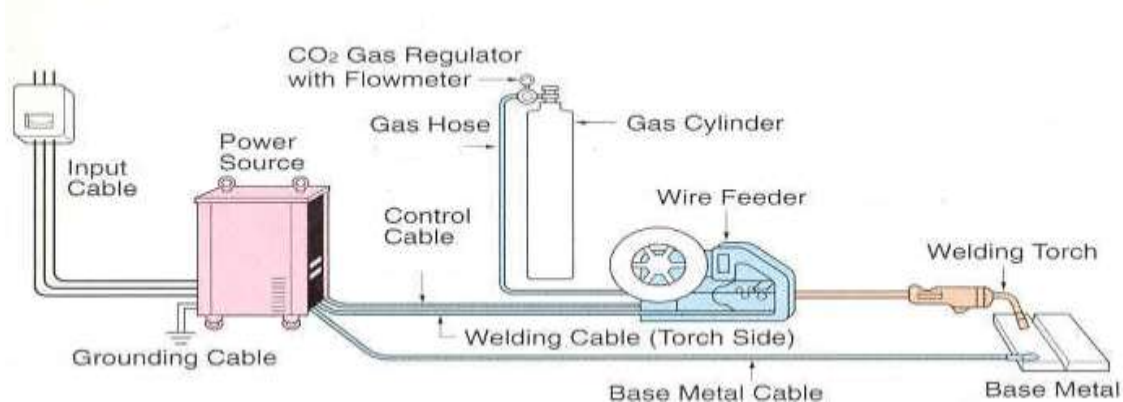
Metal inert gas welding (MIG)
